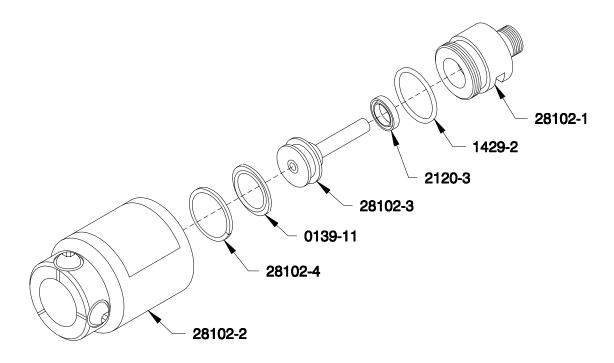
Air Cylinder Assembly (Part No. 28102), Exploded View
